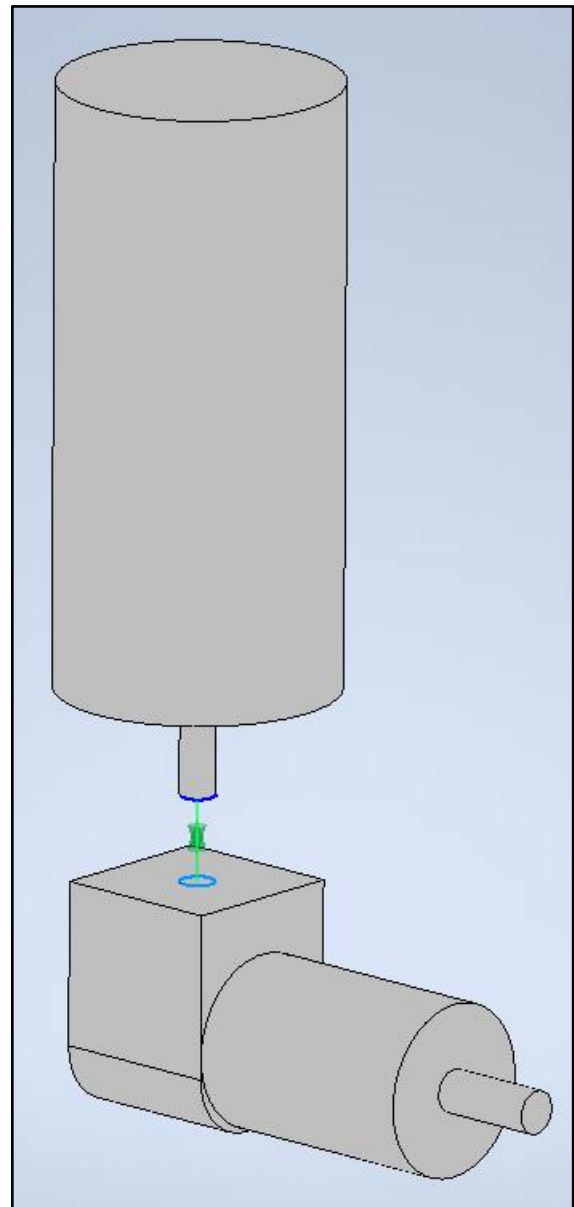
Preliminary design of the coupling between the BG 65x75 motor and the CPK 005 MF gear train
